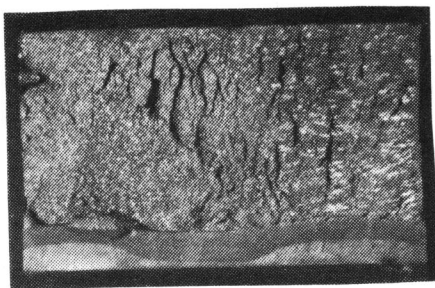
The improvement of the fatigue crack front by using SHR method.
